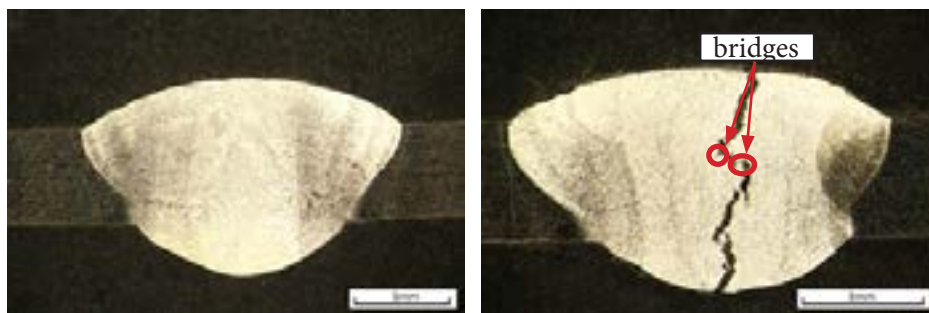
Cross-section of the welded joints made in INCONEL 617 (SM):
